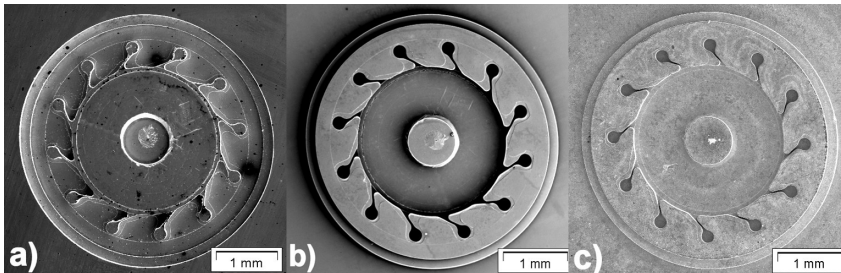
a) Mold insert for injection molding, b) PMMA pattern, c) cast part made in gold base alloy Stablor® G
